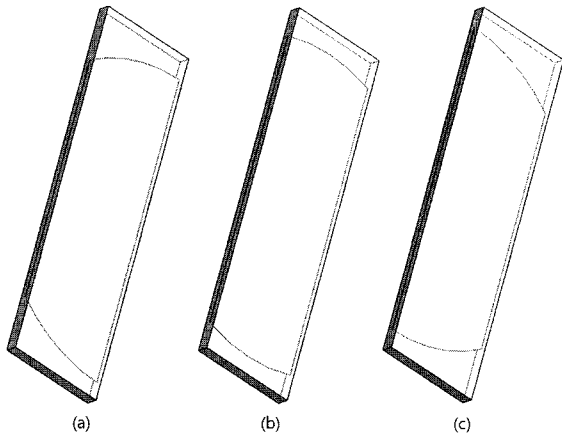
Three shapes of slit channel manufactured by using a precision rotary milling machine. (a) Type A; (b) Type B; and (c) Type C
